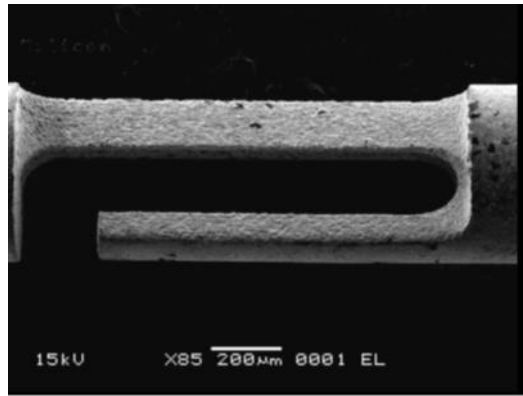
A steel micro-scale machining artefact fabricated by turning/EDM sequential machining [30]
